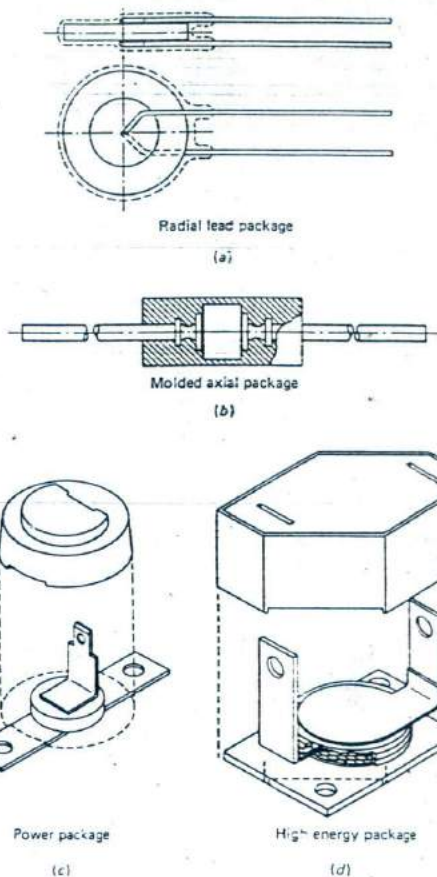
MOV package styles. (Courtesy General Electric Co.).
